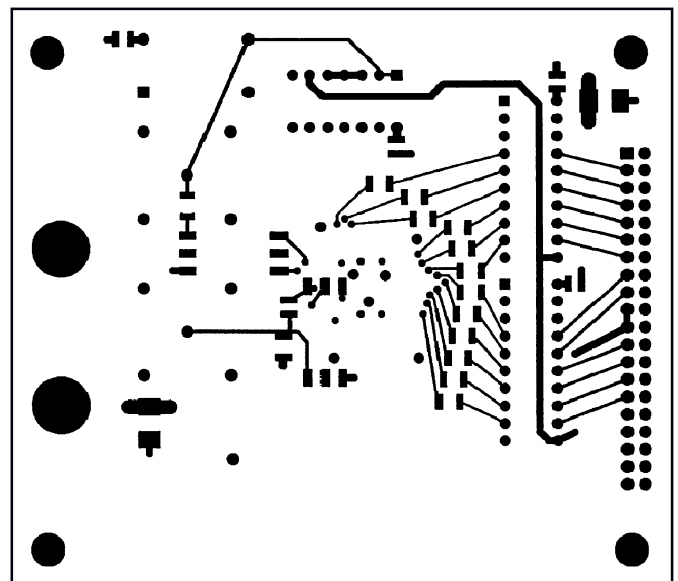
AD9042ST/PCB Bottom Side Copper (Positive)
